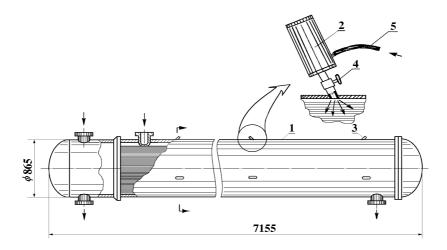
Heat exchanger 800 TNG. 1 — housing; 2 — pnevmatic pulse device; 3 — tube; 4 — valve; 5 — air supply.
